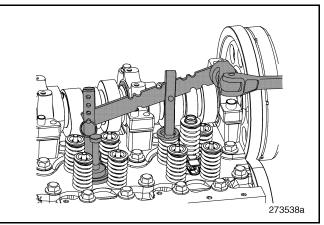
Removing Valve Springs with Alternate Valve Spring Compressor (Tool No. J 41989)
